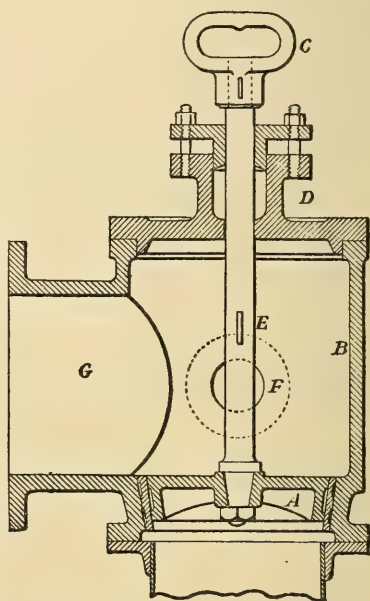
Conical Brass Valve and Seat, with cast-iron Valve Box for Discharge Pipes from Hot Well.
